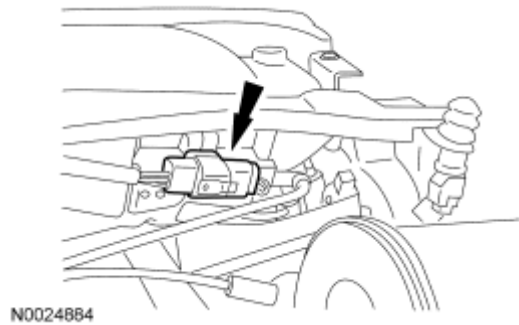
Locating Windshield Wiper Motor Electrical Connector
